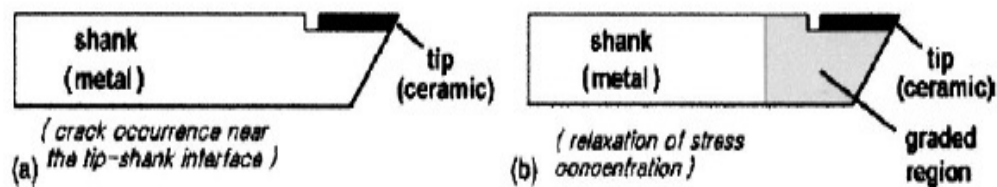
Conventional vs. FGM Lathe Metal Cutting Tool (El-Wazery and El-Desouky [5])
